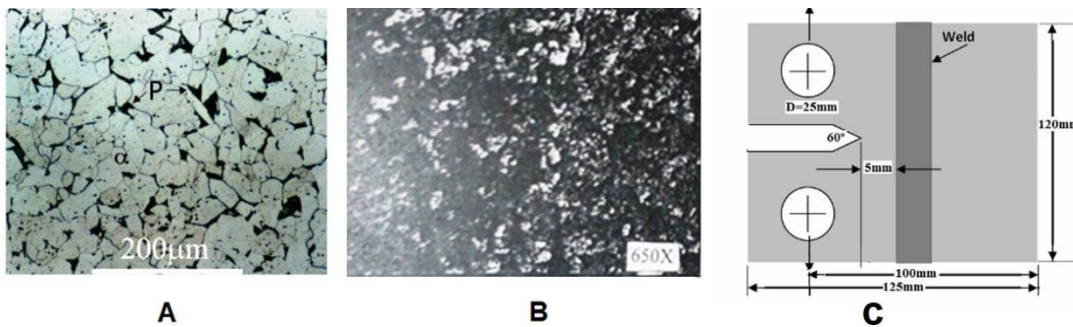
(A&B). Microstructures of Base Metal & Weld Metal, (C). Welded CTS
